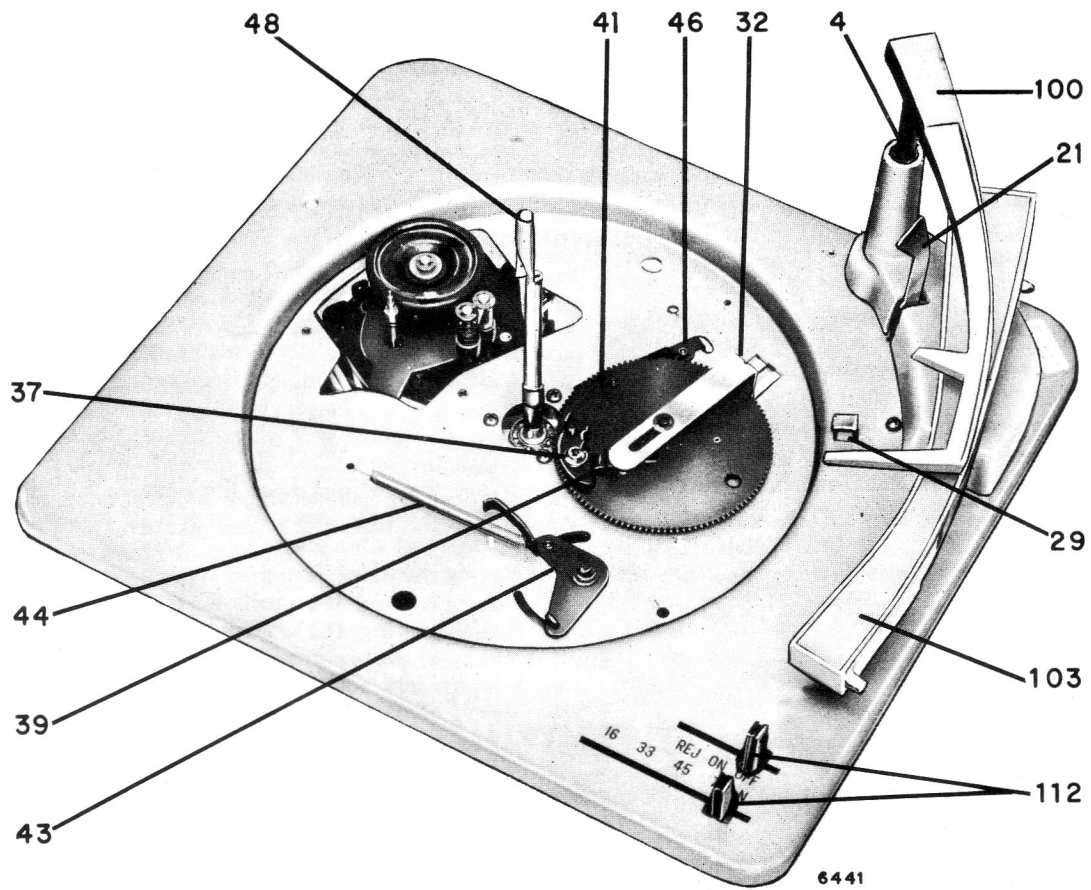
Top View of RC700 Changer with Turntable Removed. Changer out of cycle.
